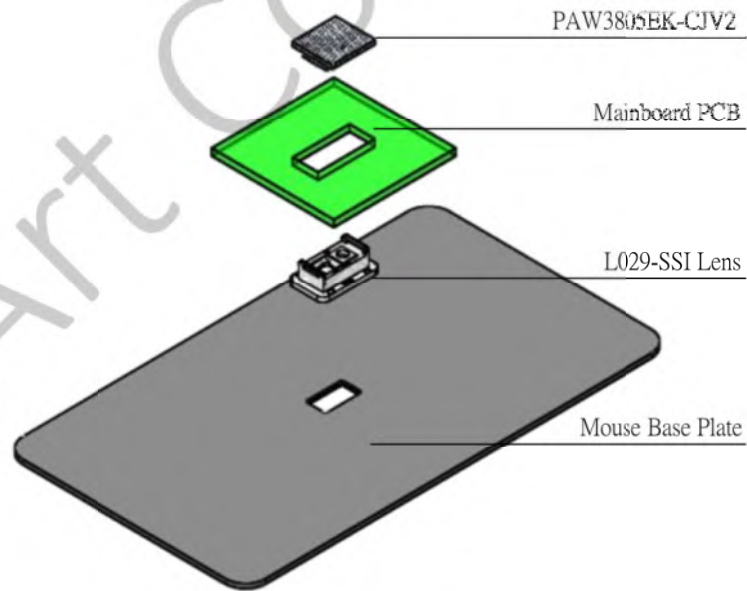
Exploded 3D Assembly View of Chip, Lens, PCB and Base Plate
